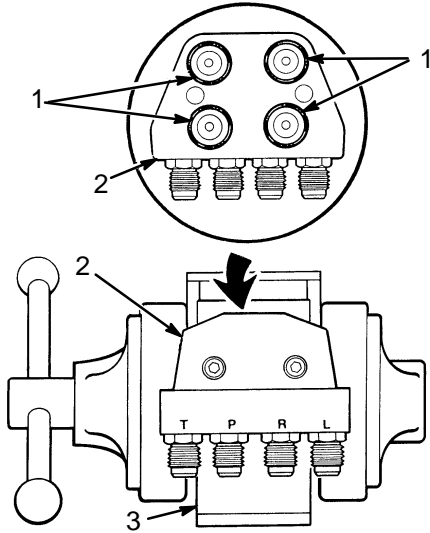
ASSEMBLY OF THE STEERING CONTROL UNIT (3 of 4)
